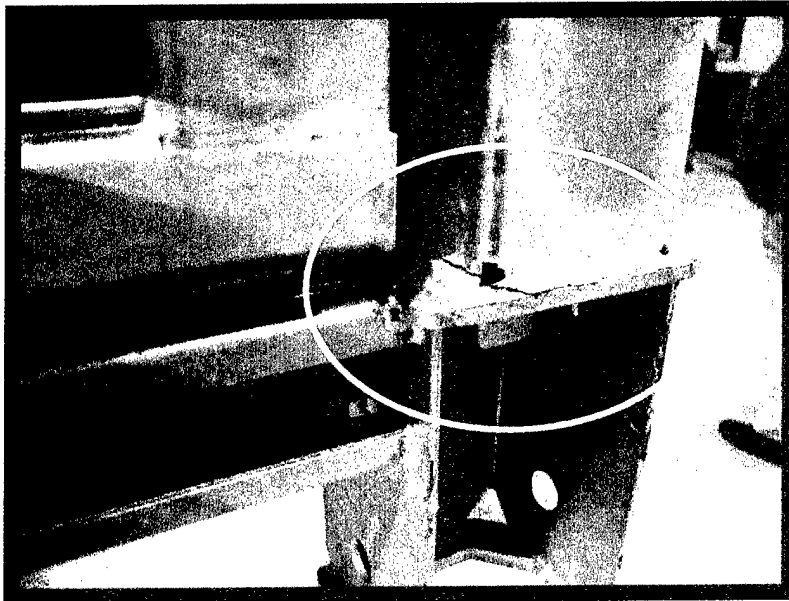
Corner Post Weld Crack on ISTF Unit #2.
